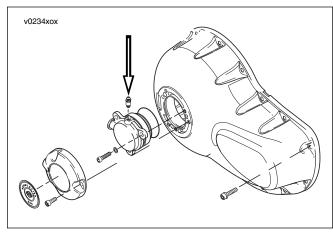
Secondary Clutch Actuator Bleed Screw
